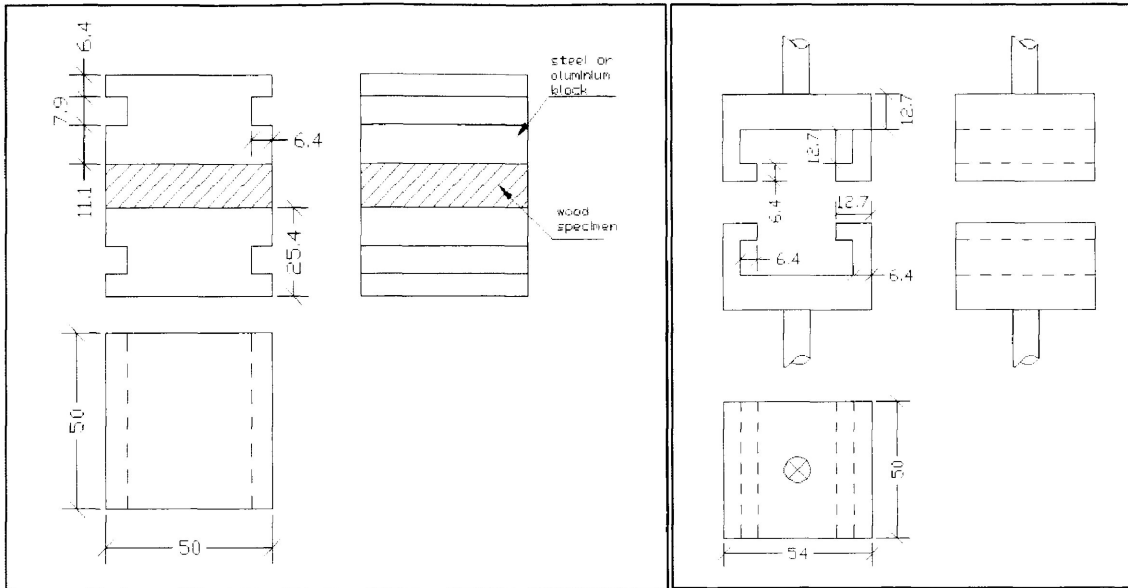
Details of Bonded Specimen and Blocks (Left) and Loading Fixtures (Right) (mm).
